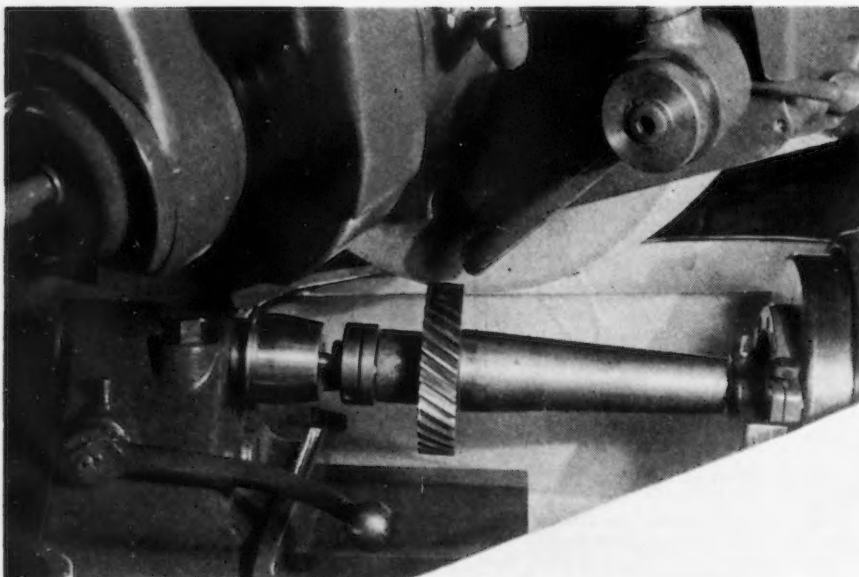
In this gear tooth grinding set-up the gear is placed on the arbor so that one face locates against a shoulder, which must be square with the bearing plug. A nut clamps the gear through a full-floating equalizing washer which contacts the opposed face.
